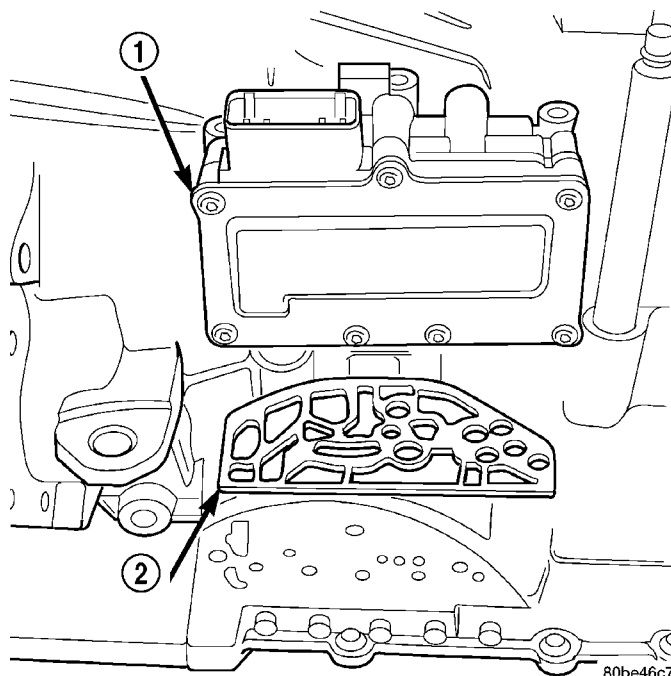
Solenoid/Pressure Switch Assembly and Gasket
